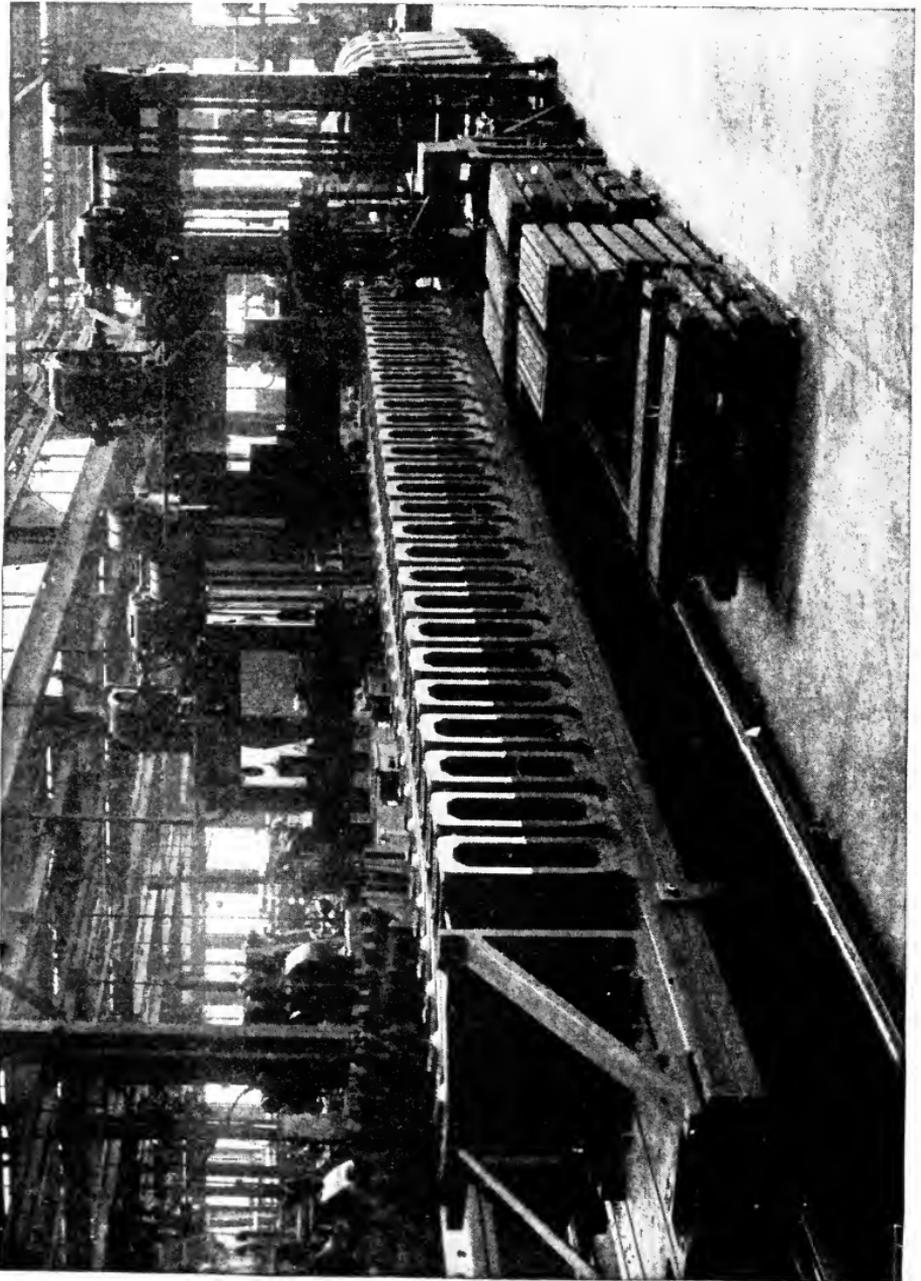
Production Planer Machining 28 Columns in 12 Hours, Using Gang Tool in Each of Four Tool Heads
